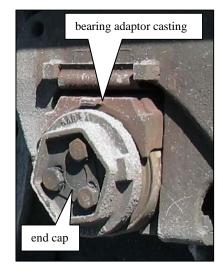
A wheel-bearing located in a freight wagon bogie side-frame pedestal
